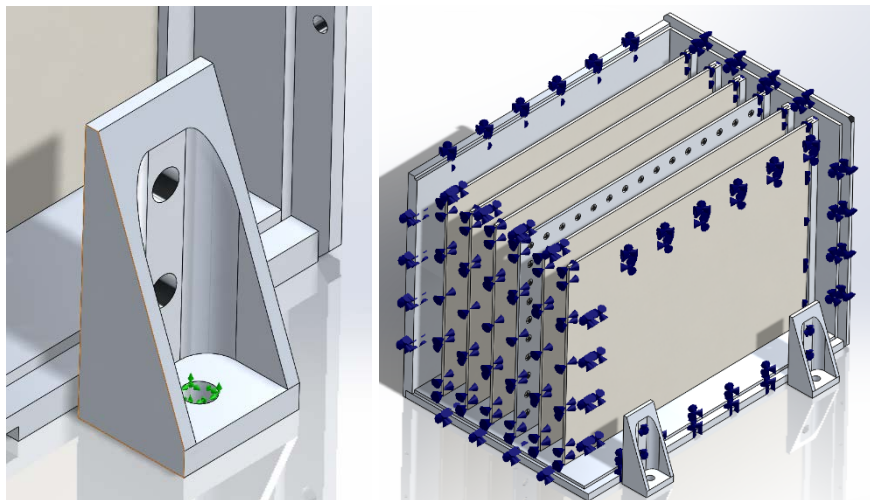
Fixed mounting flanges, fixed cards/card anchors, and joined fasteners.
